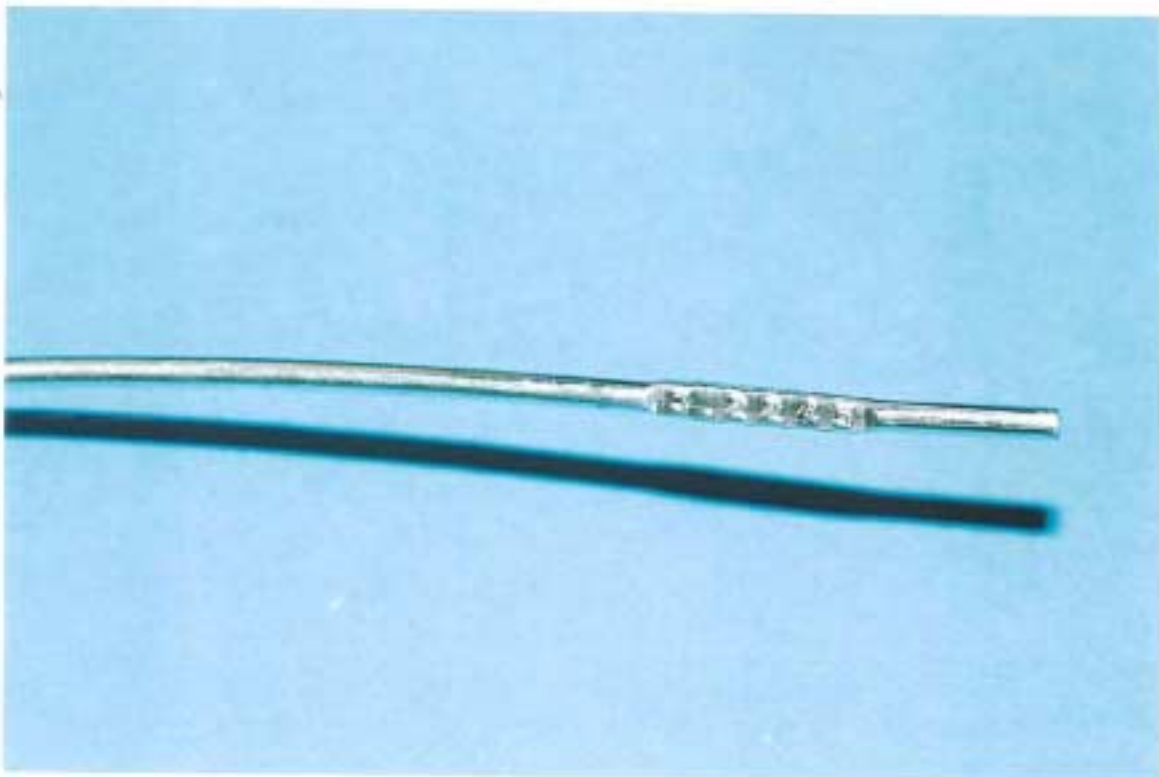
Embossed number sequence apparent at the opposite welding consumable wire ends.
